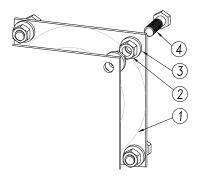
Flat Washer (3) must be placed against "rubber side" (1) of Spring Mount
